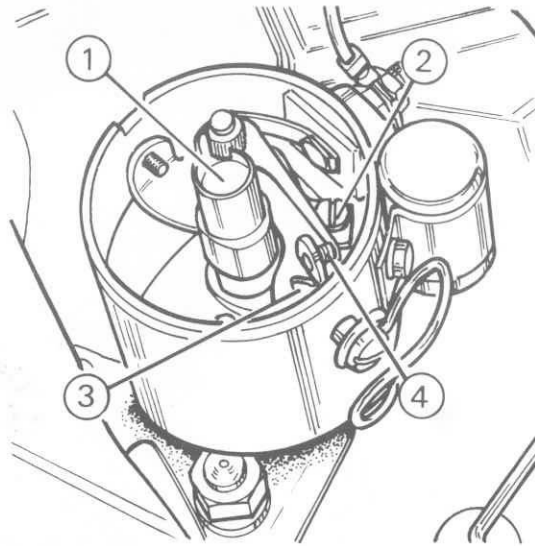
3 Distributor with cap removed to show the contact breaker. The contact breaker gap can be adjusted after slackening the screw that secures the fixed contact
